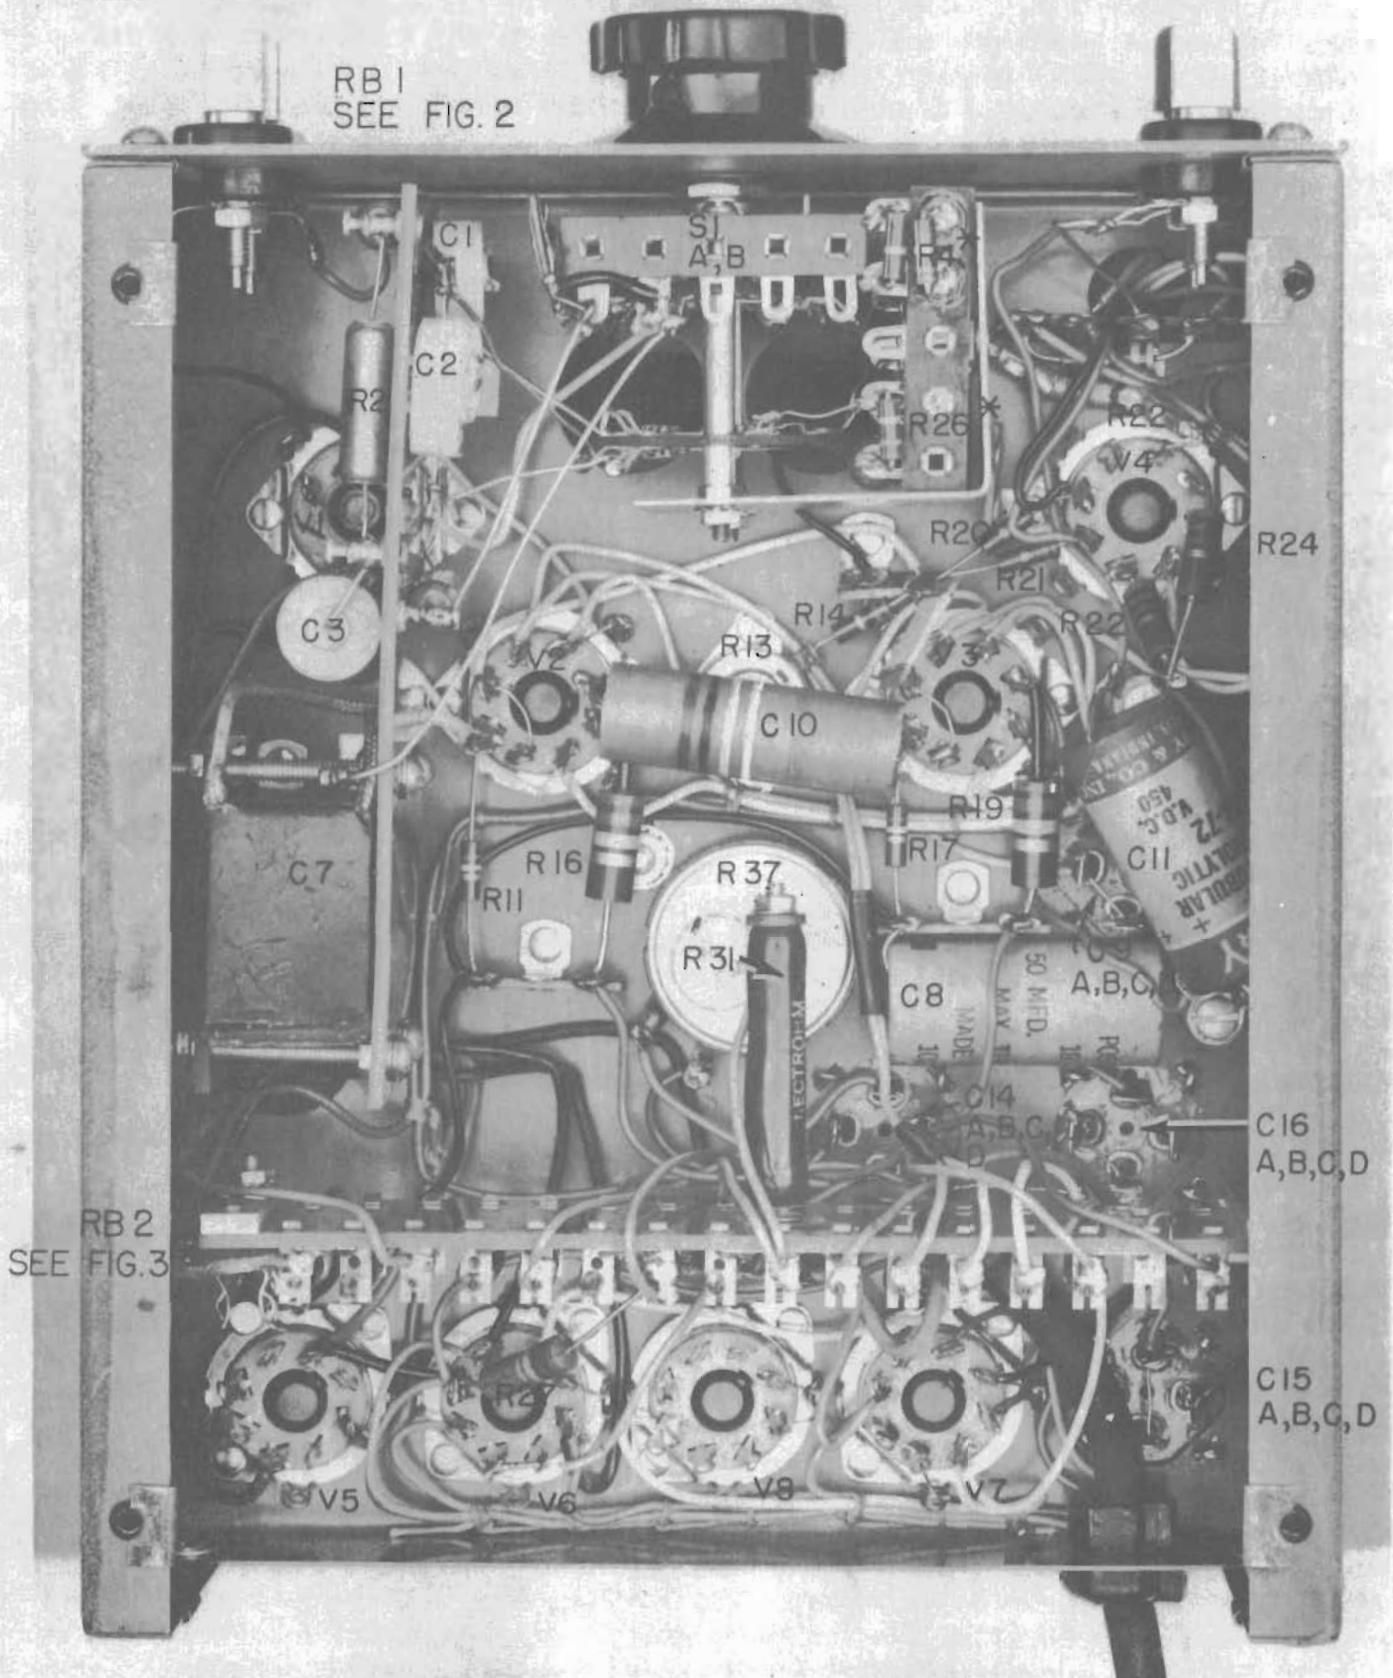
Bottom View of Model 400B Bottom Plate Removed
